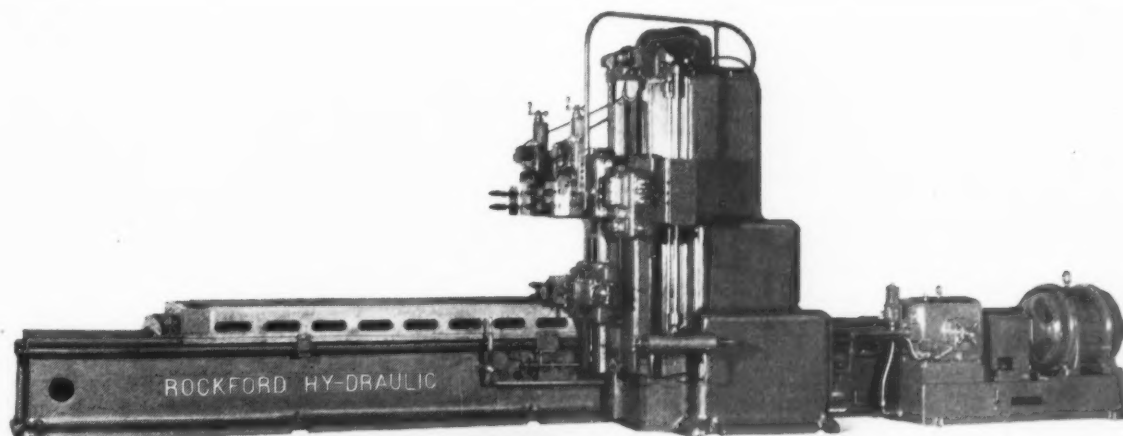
"Hy-Draulic" Planer Brought out to Supplement the Shapers and Shaper-planers Built by the Rockford Machine Tool Co.
